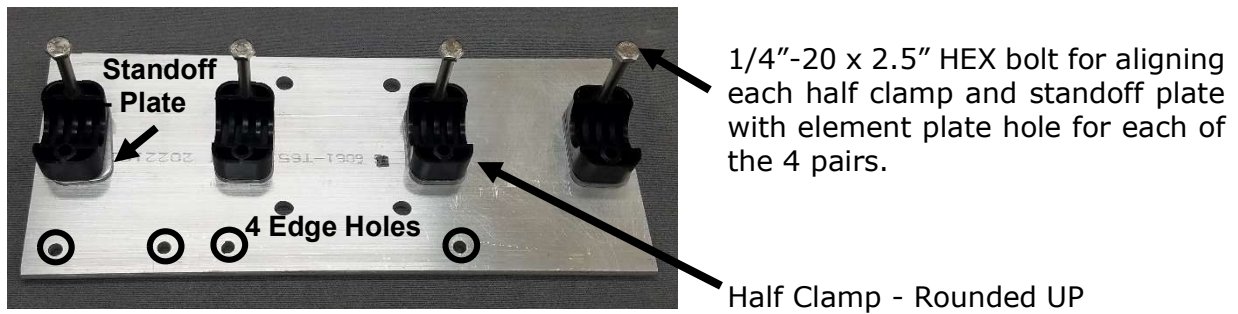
Mounting plate with PA-clamps, standoffs and HEX bolts.
